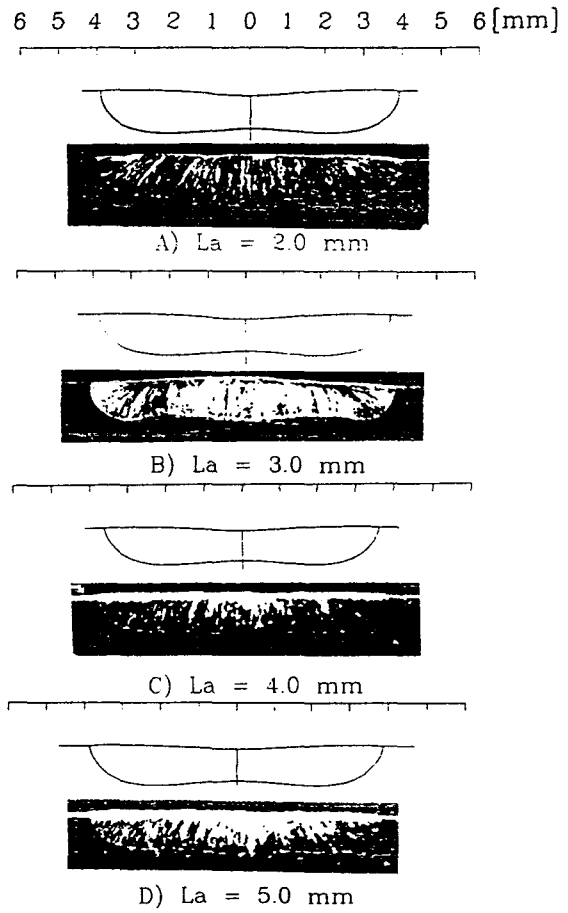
Fusion shapes with arc length for  $I=150 \text{ A}$  and  $\theta_e=60 \text{ deg.}$  after 3 sec welding
